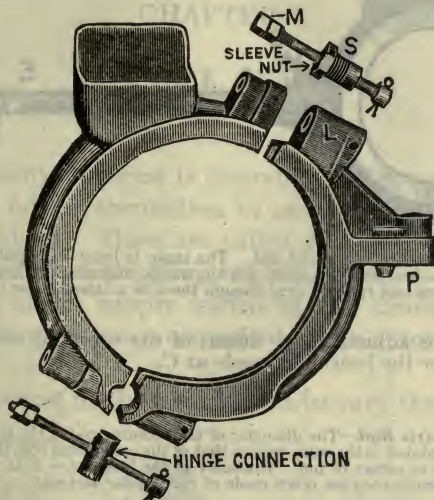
Eccentric for large engines. Usually made in two unequal parts H , H' , and held together by the key bolts M , S . The eccentric is retained in position by a key and set screw.
